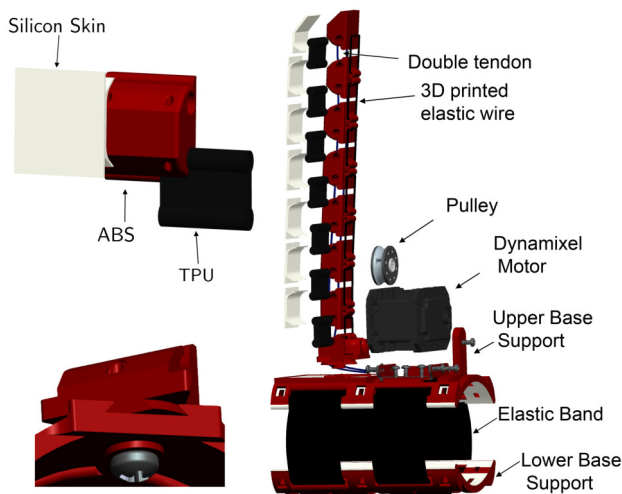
The CAD exploded view of a module (top left), the passive locking mechanism (bottom left), and the complete Soft-SixthFinger (right) with its tendon holes, support base, and actuator.
